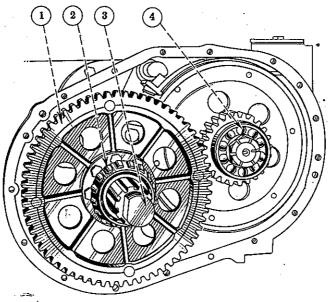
Illustration No. 54 Sprocket drive gear, shaft and bearing.
